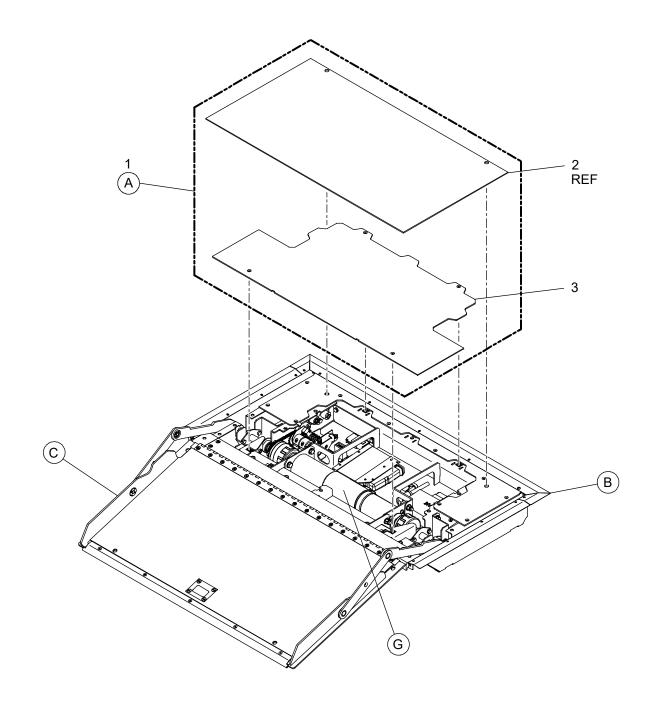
FR2E-SERIES RAMP ASSEMBLY (SHEET 1 OF 5)
